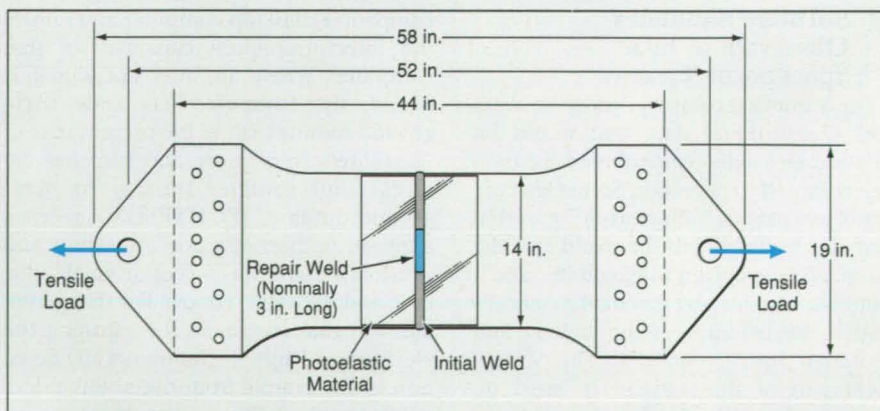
A Wide-Panel Specimen is a repair-welded test panel that contains both a repair weld and a substantial amount of surrounding material, as would typically be found in a practical repair-welded structure. In this case, the specimen includes clevis plates to facilitate tensile testing. The dimensions shown here are typical only.
